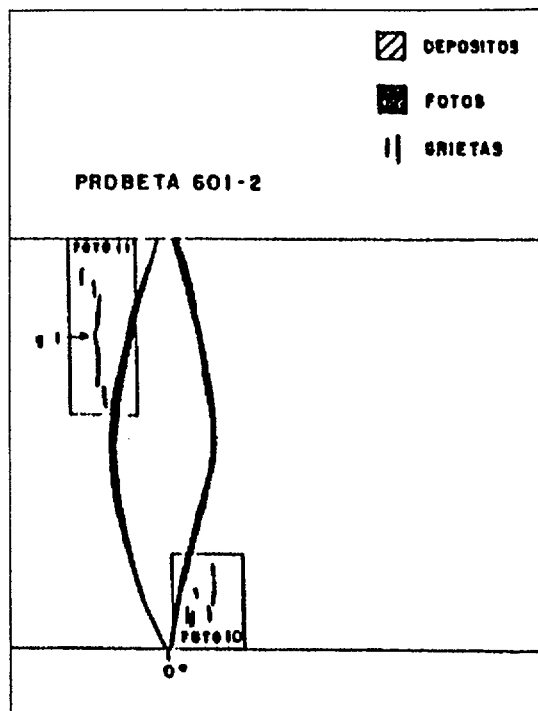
Model Boiler 601-2, 19.33 volt, 0.59" TW, negligible secondary cracking.
